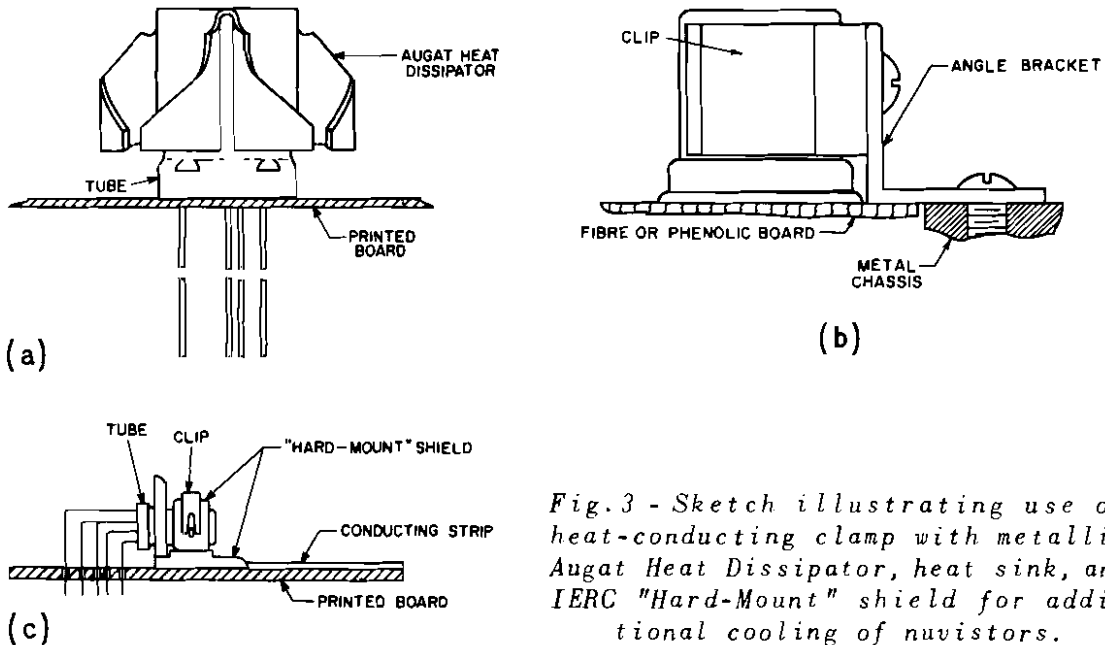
Sketch illustrating use of heat-conducting clamp with metallic Augat Heat Dissipator, heat sink, and IERC "Hard-Mount" shield for additional cooling of nuvistors.
